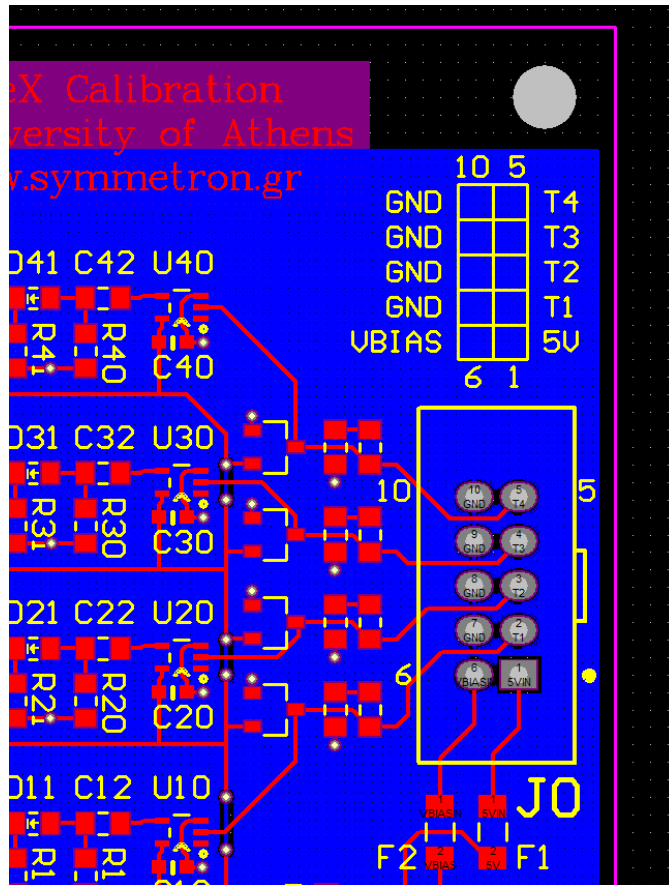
FCAL-CTRL PCB: control cable connector J0 pin assignments.
